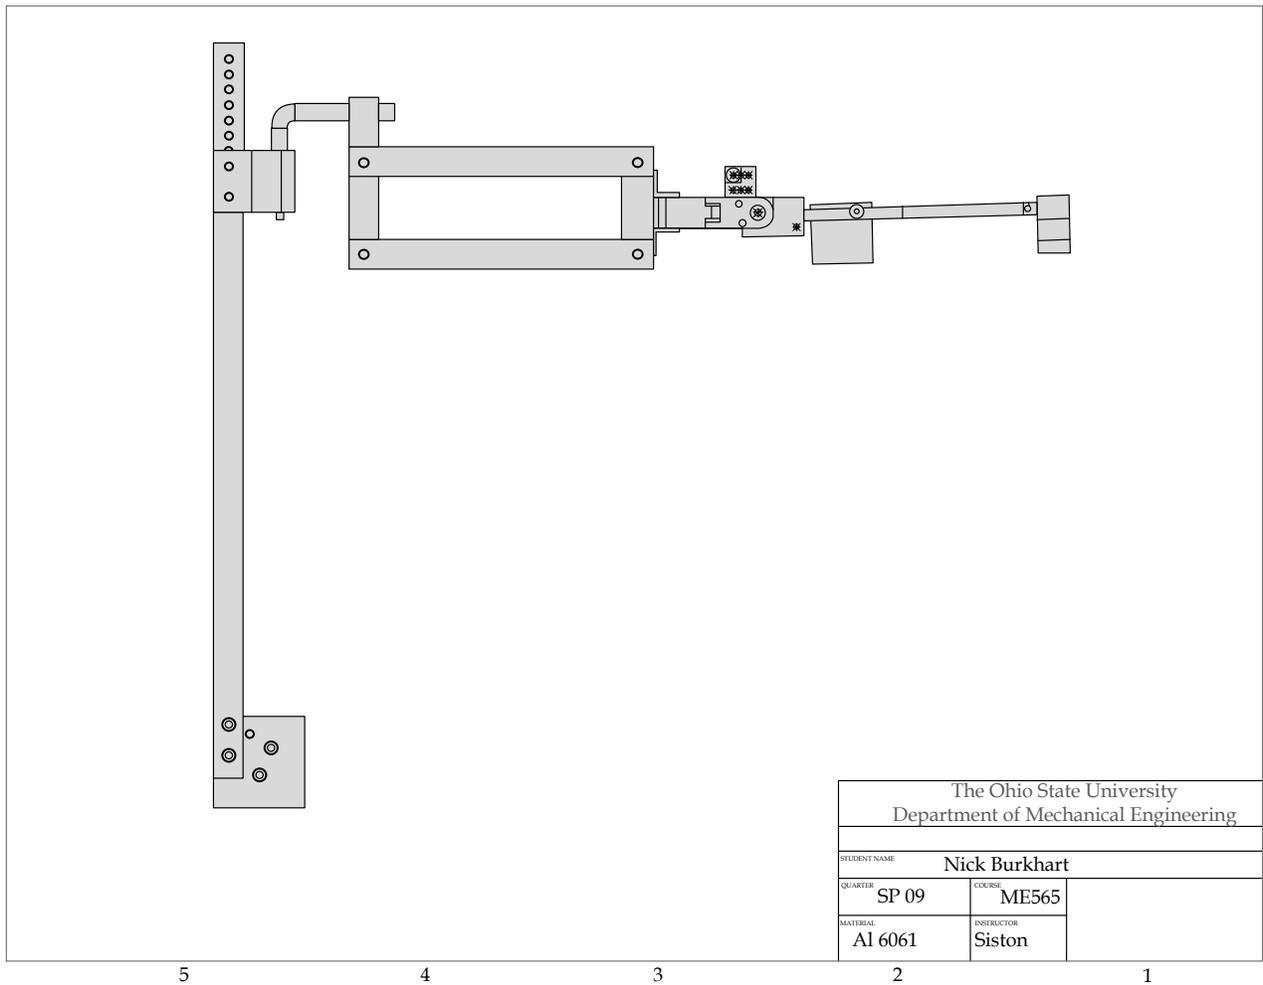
Technical drawing of the Ohio State Mobile Arm Support.
